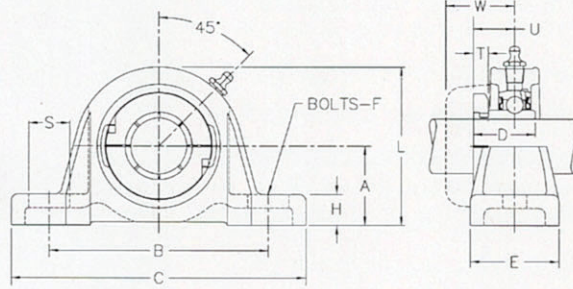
Bolt Ball Bearing Pillow Block Unit
